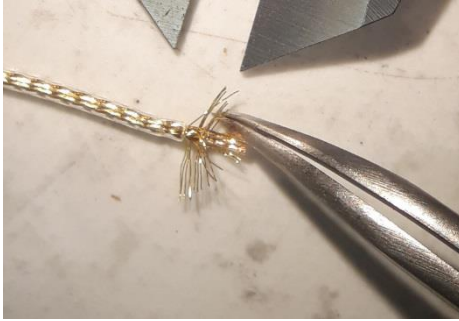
Using tweezers, bend back the gold-coated copper strands leaving the inner exposed.
